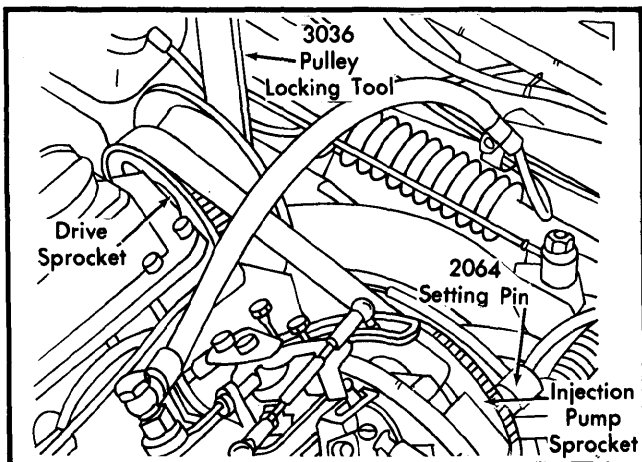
Locking Injection Pump and Vacuum Pump Pulleys (Audi)
